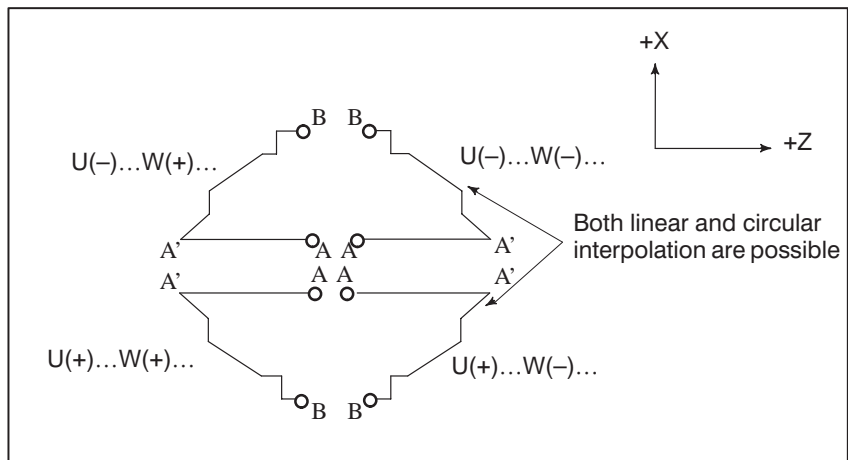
(b) Signs of Numbers Specified with U and W in Stock Removal in Facing
